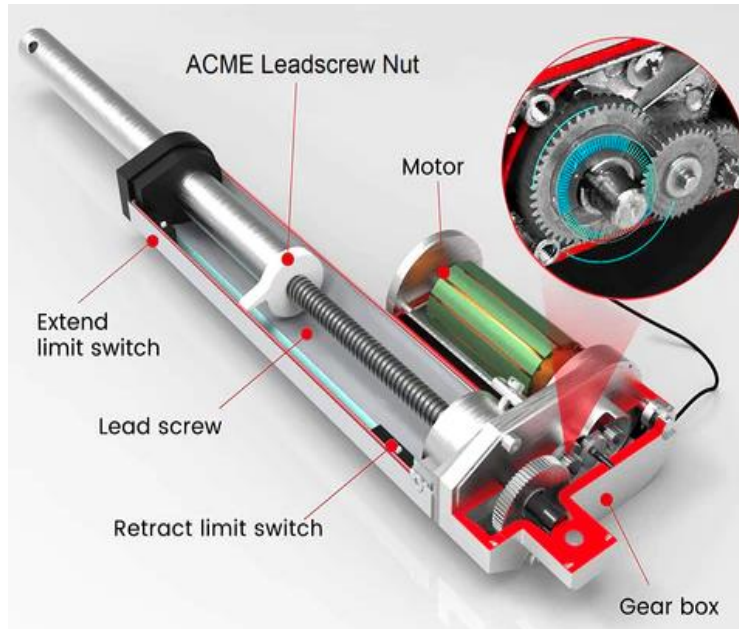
Electromechanical linear actuator inside view, a rotating motor converts rotational motion into linear motion.
